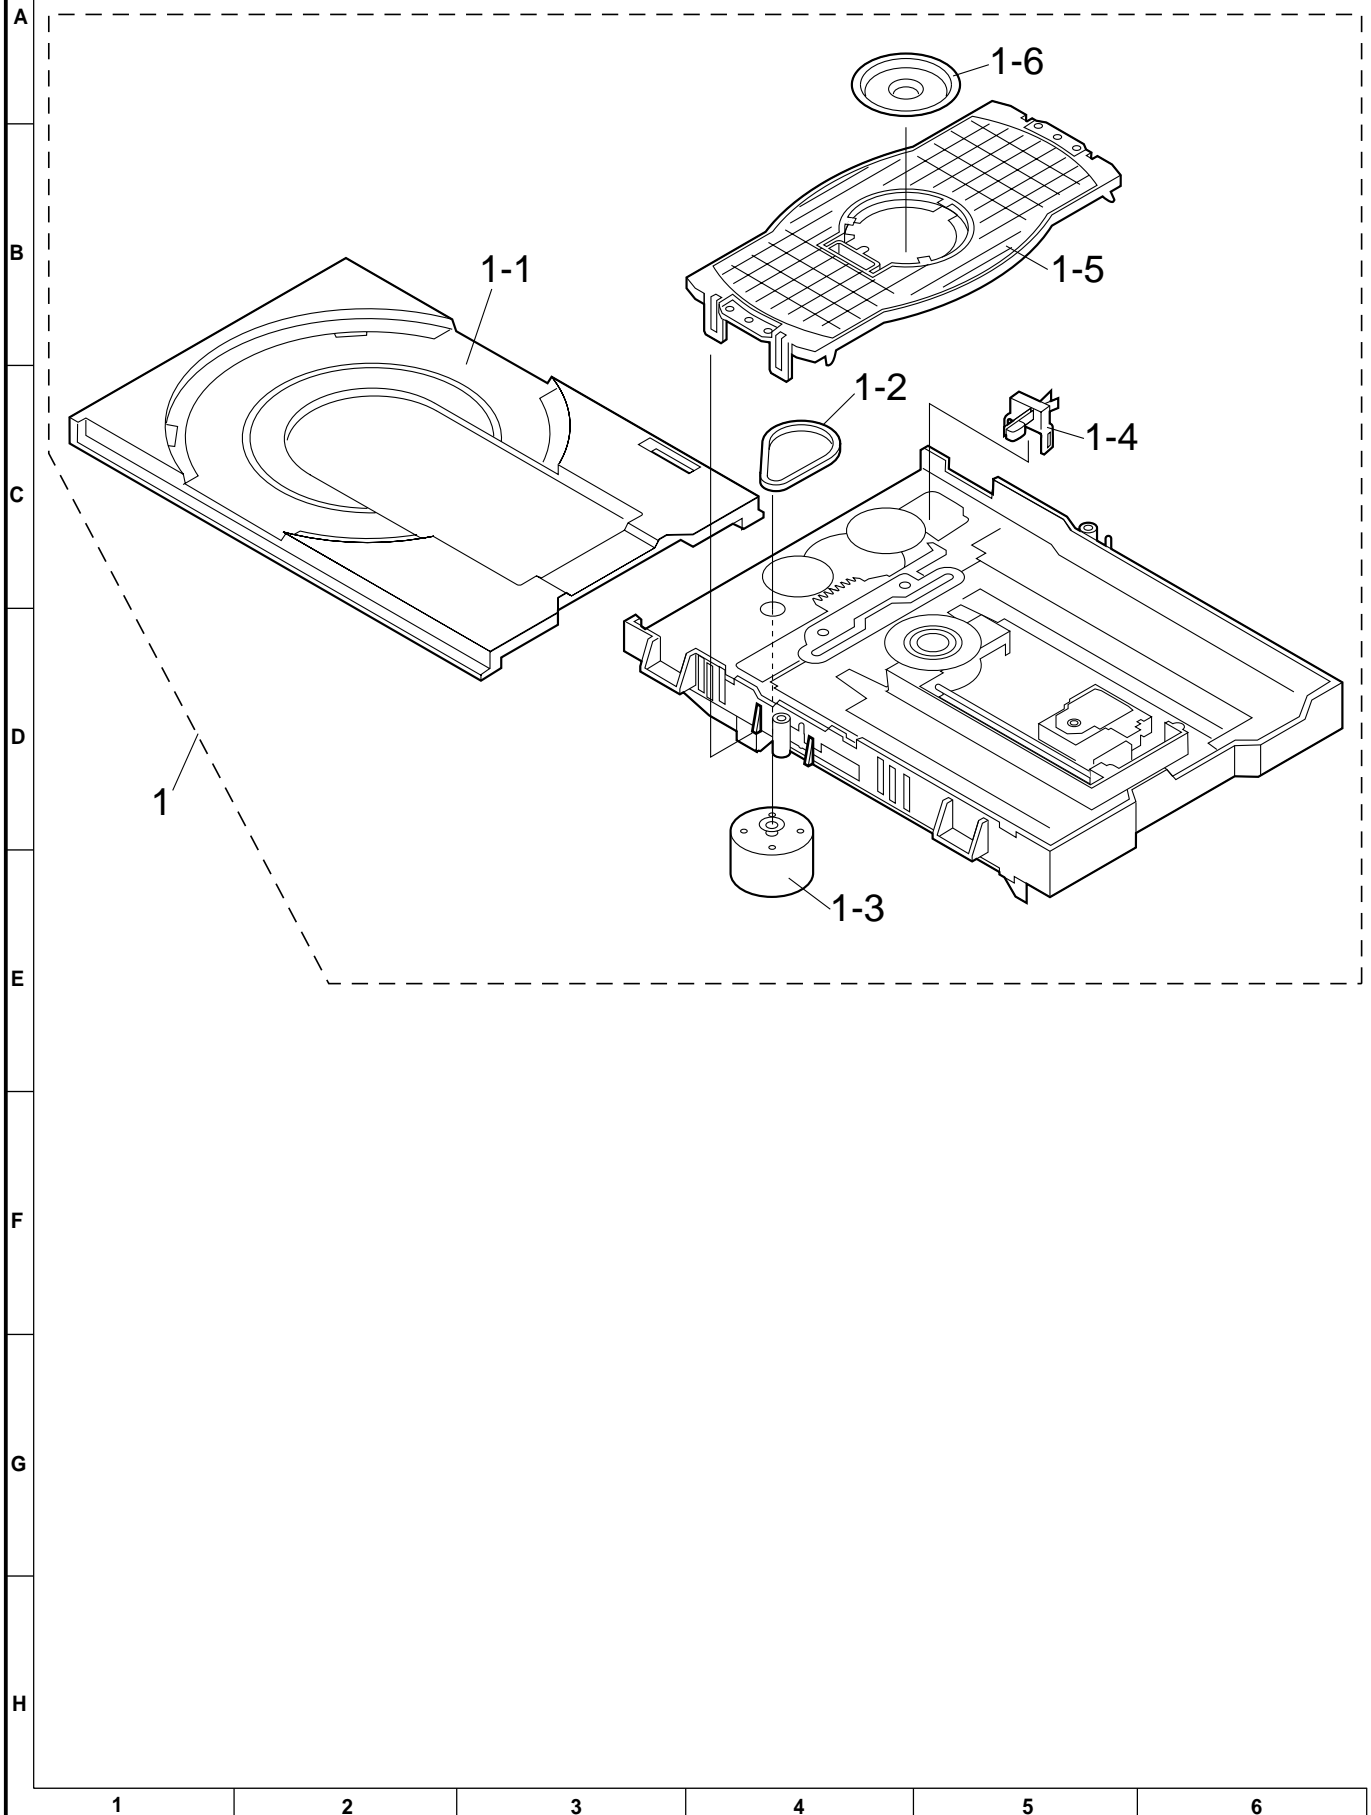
CD-R UNIT SERVICE PARTS EXPLODED VIEW
